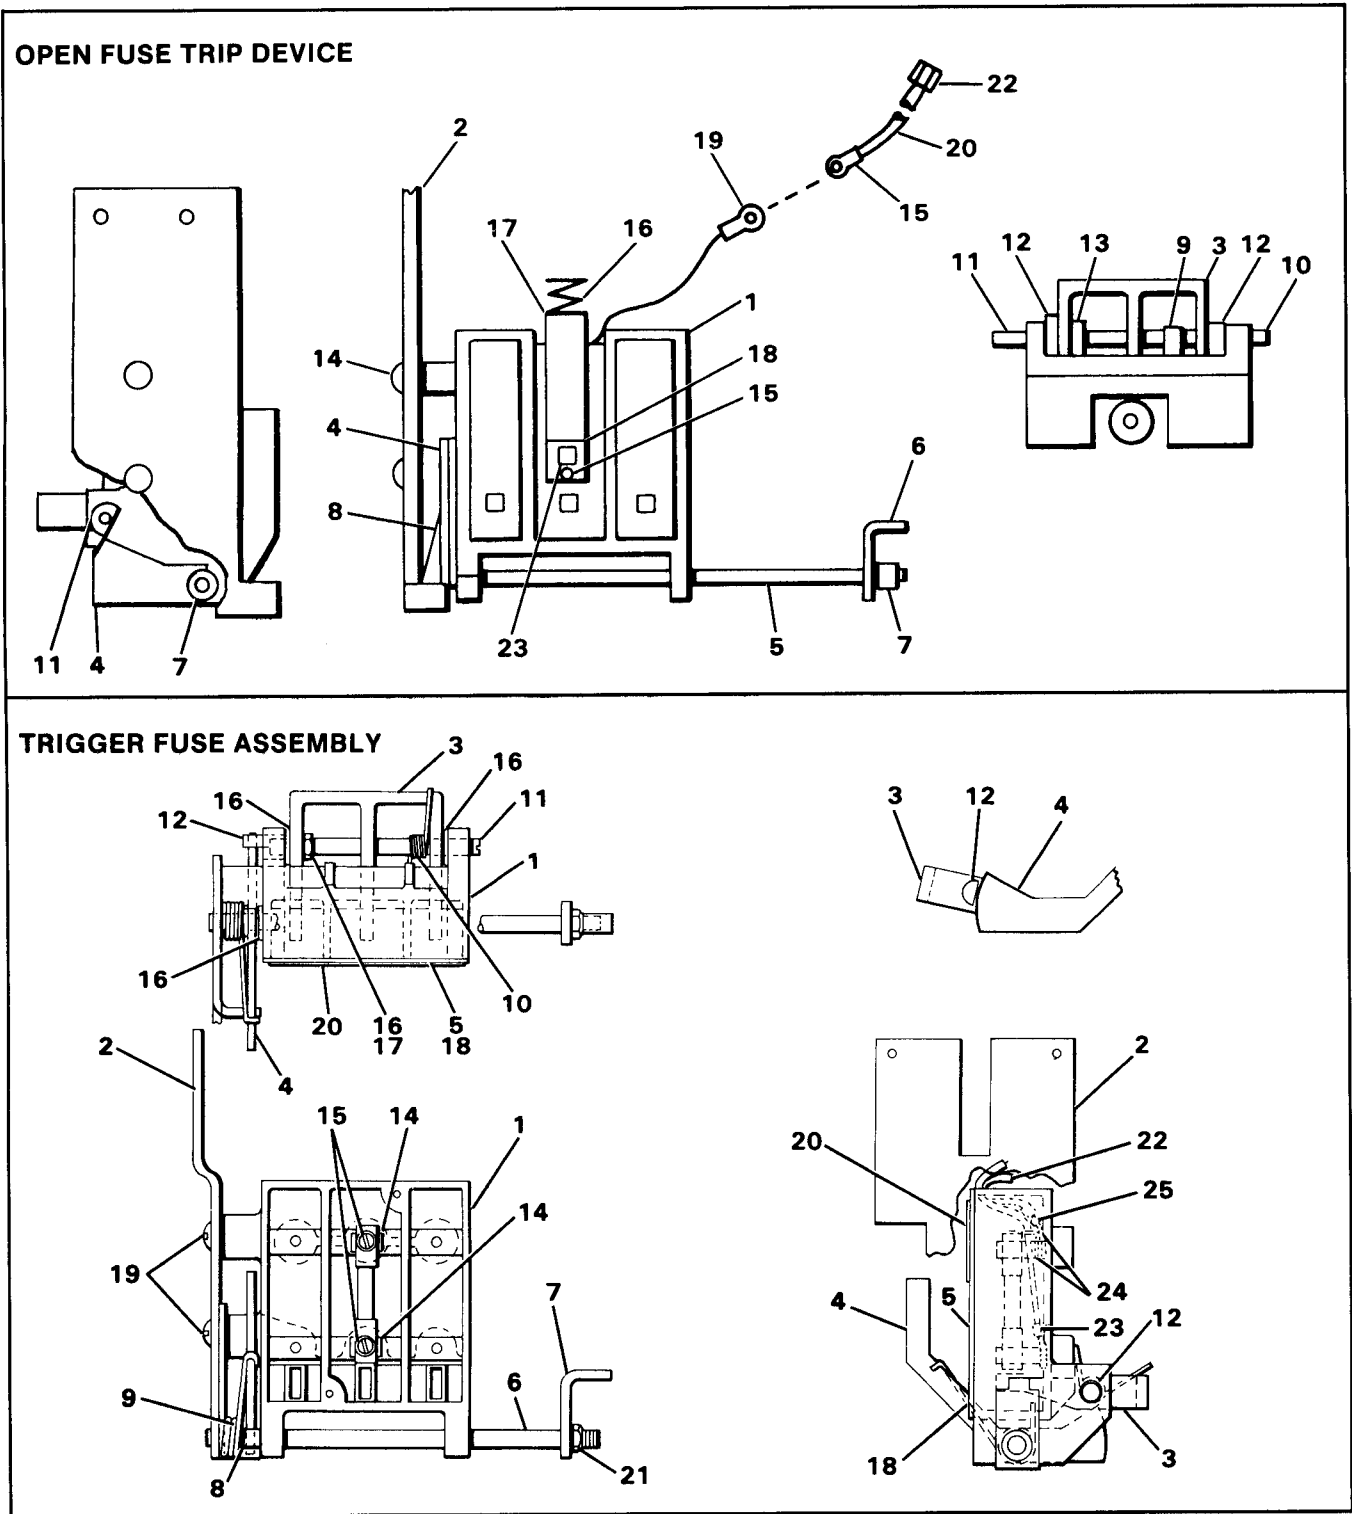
Open Fuse Trip Device, Trigger Fuse Assembly
